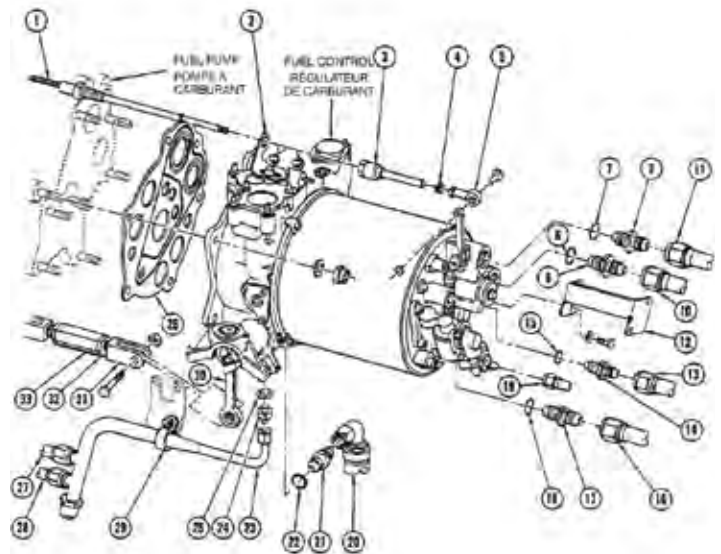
Five of the self-locking nuts on the gasket (see no. 26) between the engine-mounted fuel pump and the fuel control were found to be torqued incorrectly.
